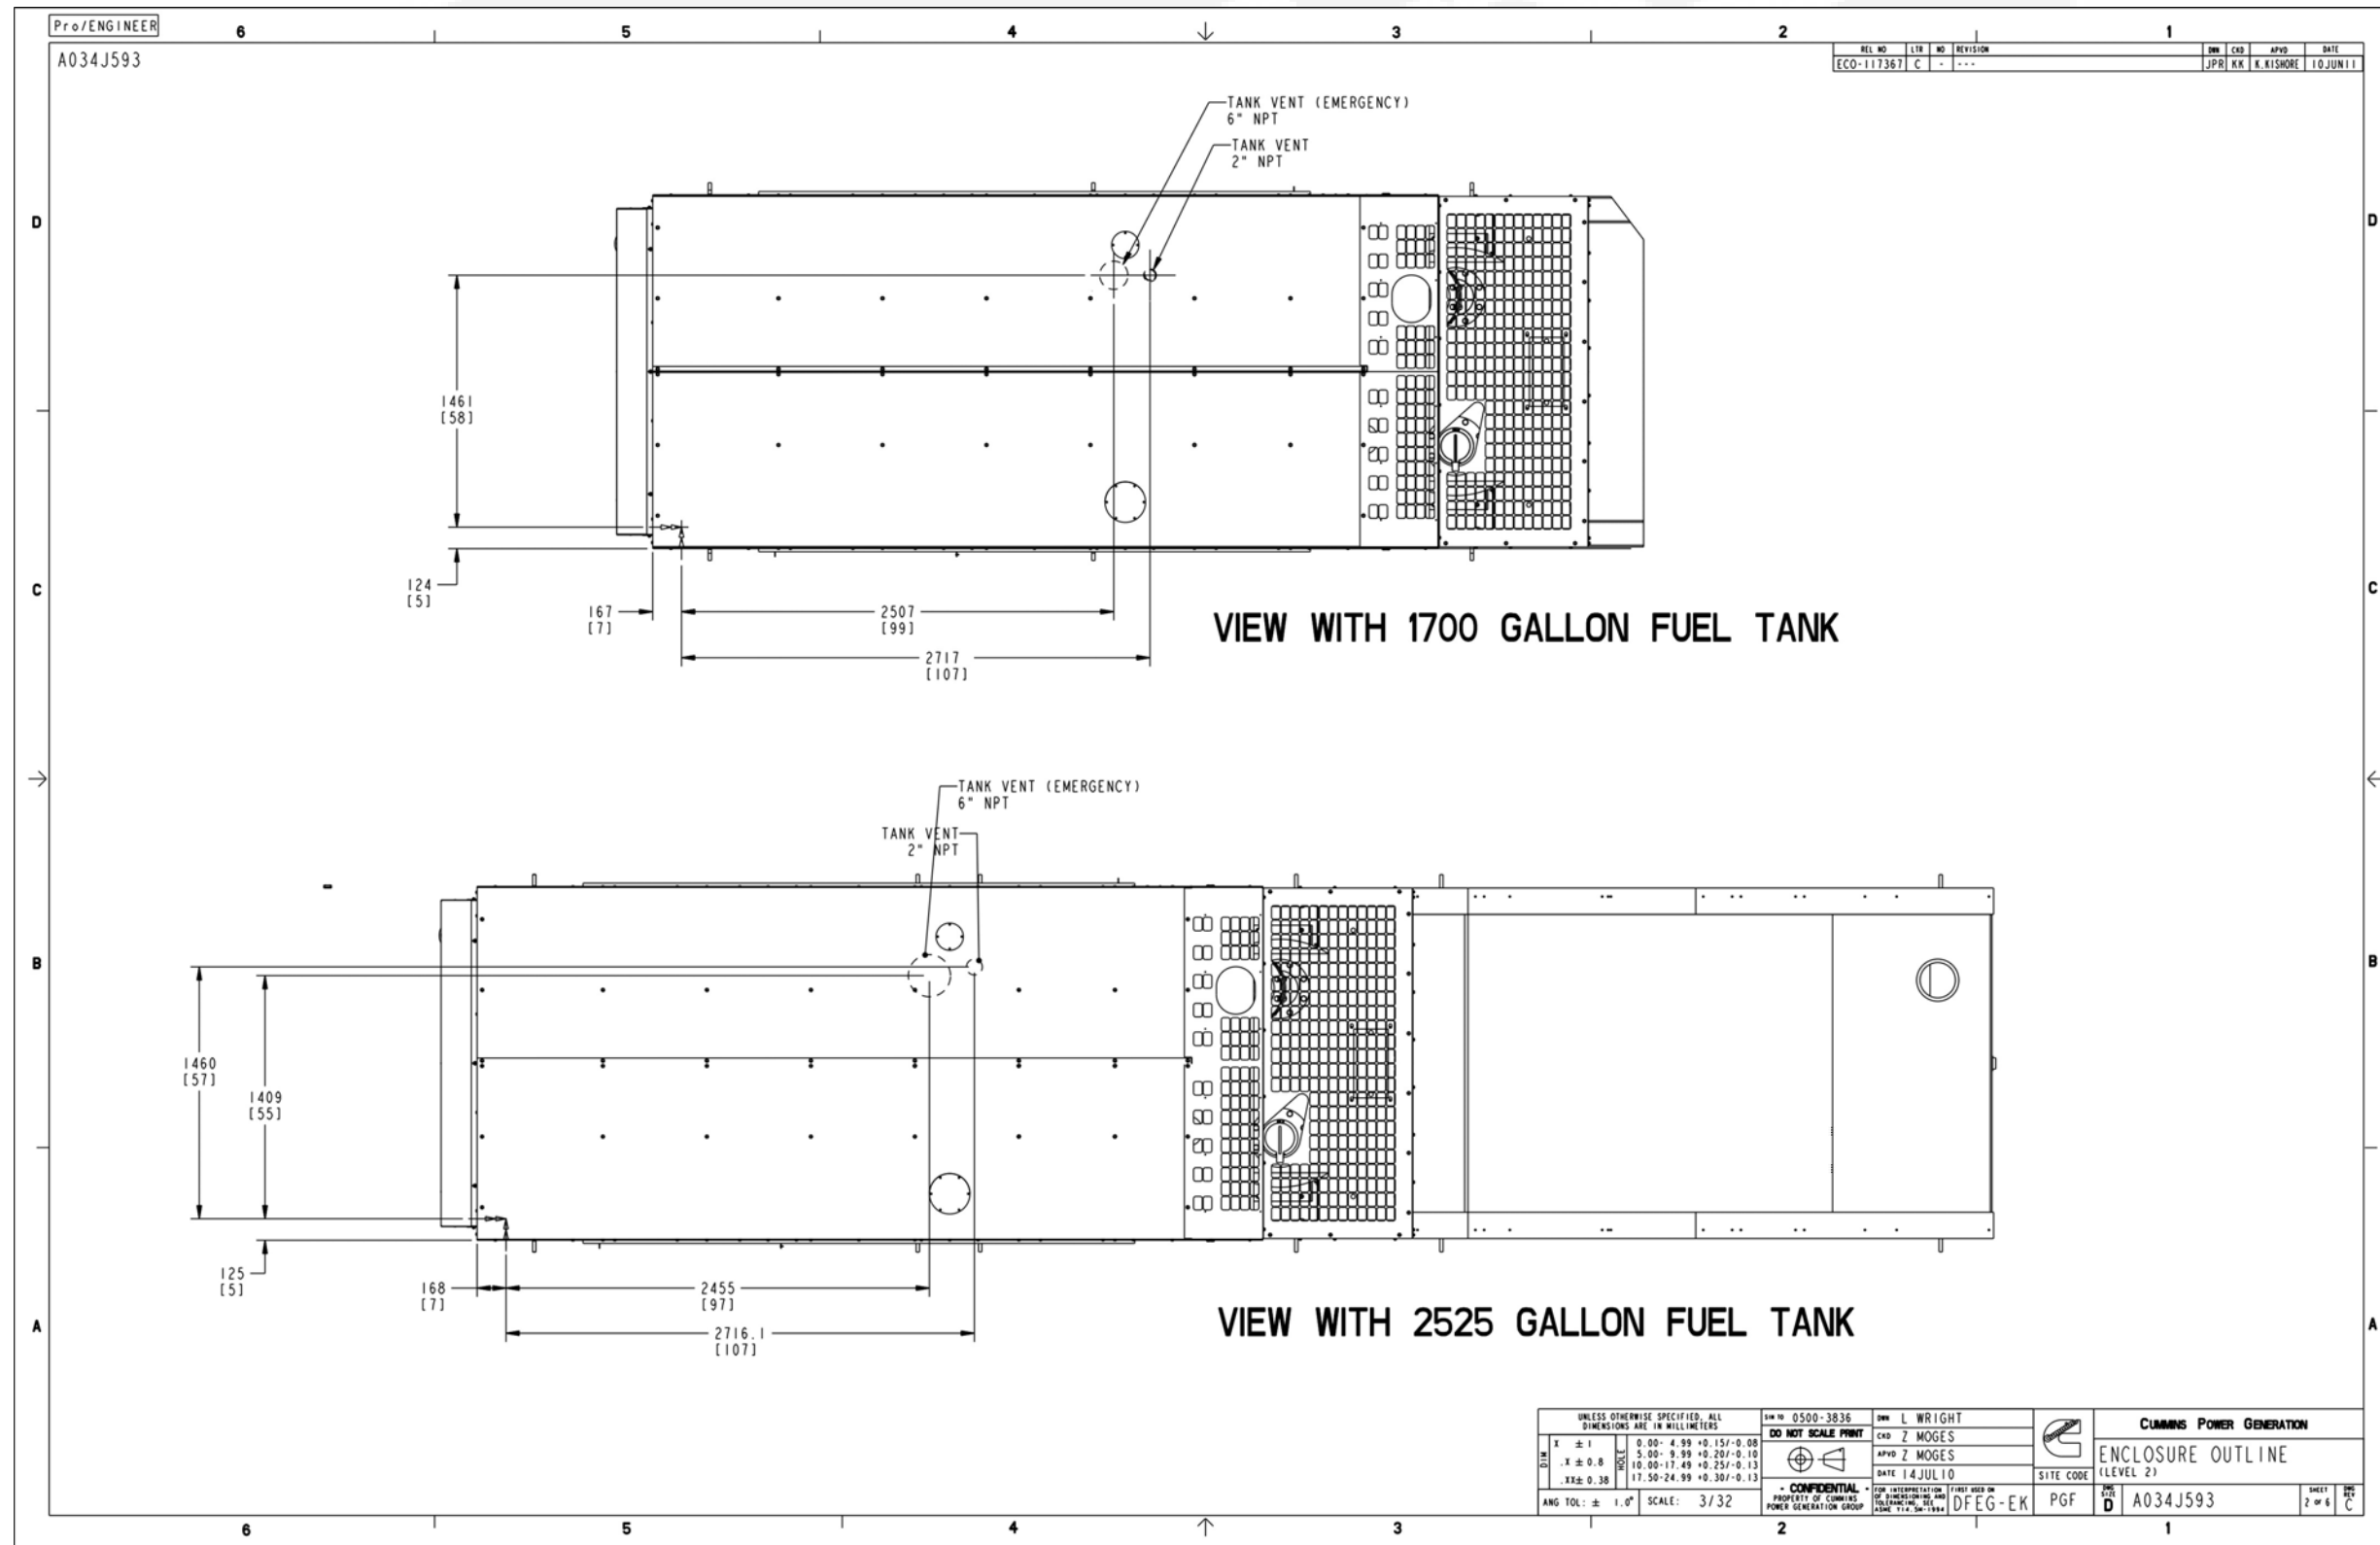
ENCLOSURE OUTLINE DRAWING (F202, F205, F206, F208, F209) (SHEET 2)
